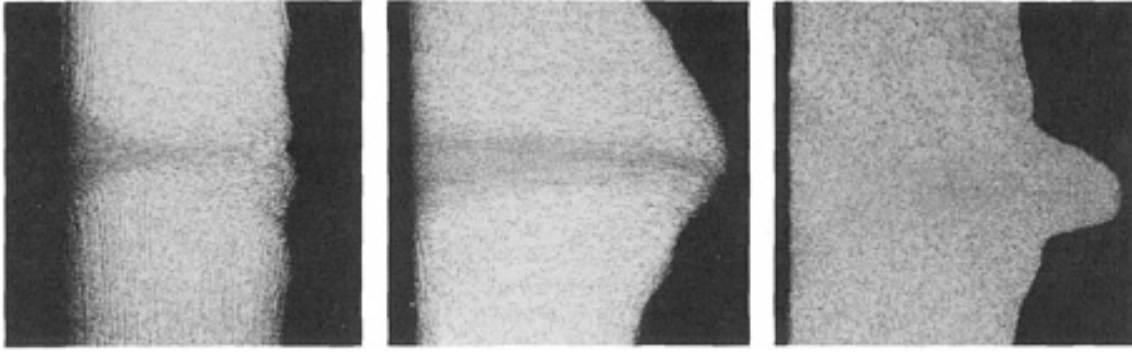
UPSET WELD CONFIGURATIONS IN BUTT WELDS OF PIPE WITH AN OUTSIDE DIAMETER OF 25 MM (1 IN.) AND A WALL OF 3 MM (0.1 IN.). UPSET HAS BEEN MACHINED FROM THE OUTSIDE SURFACE (ON LEFT). THE INTERNAL UPSET CONFIGURATION WAS CONTROLLED BY ADJUSTING WELD PARAMETERS AND JOINT DESIGN. (A) MINIMUM UPSET. (B) LARGE UPSET. (C) NARROW UPSET AT LOW FORCE. COURTESY OF WESTINGHOUSE SAVANNAH RIVER COMPANY
